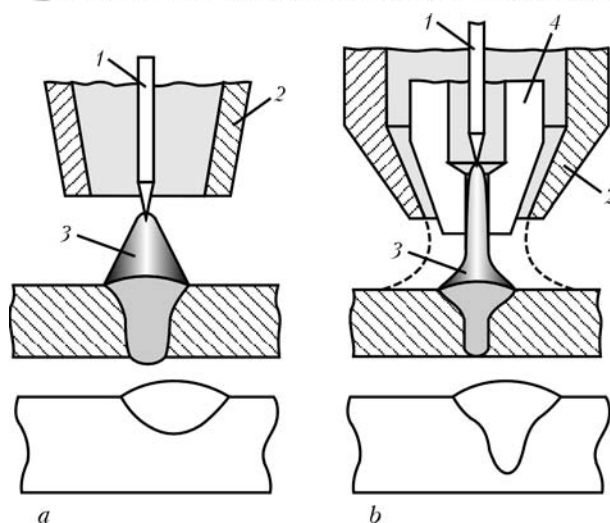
Schematic of the process and shape of weld penetration in nonconsumable electrode arc (a) and plasma-arc (b) welding: 1 – tungsten electrode, 2 – shielding gas nozzle; 3 – welding arc; 4 – plasma-forming nozzle
